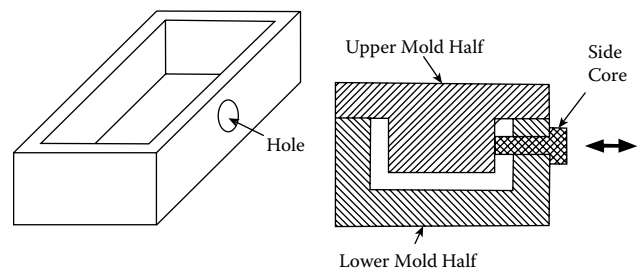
In die-casting and mechanized permanent mold casting, undercuts that prevent mold opening require core slides
